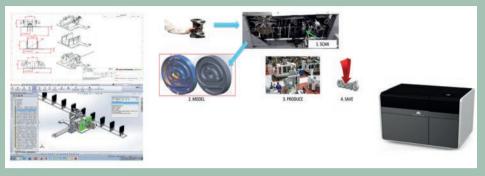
Capturing parts shapes from CAD systems or physical scanning, then outputting a replacement part on a local 3D printer
